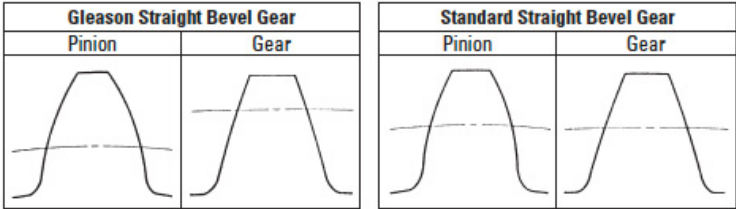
The Tooth Profile of Straight Bevel Gears
